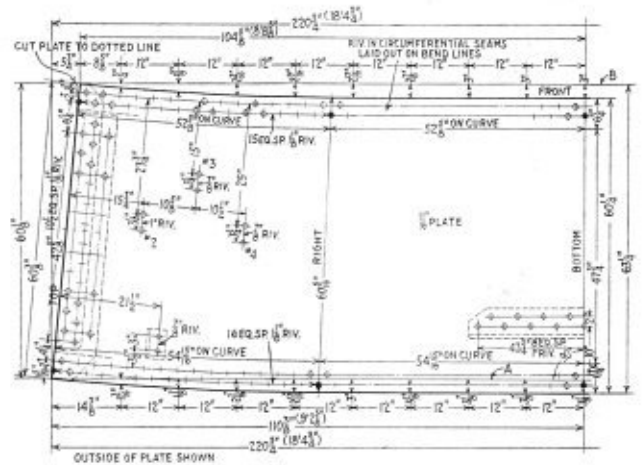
Cone course development—horizontal bottom type. Longitudinal seam on the top center
